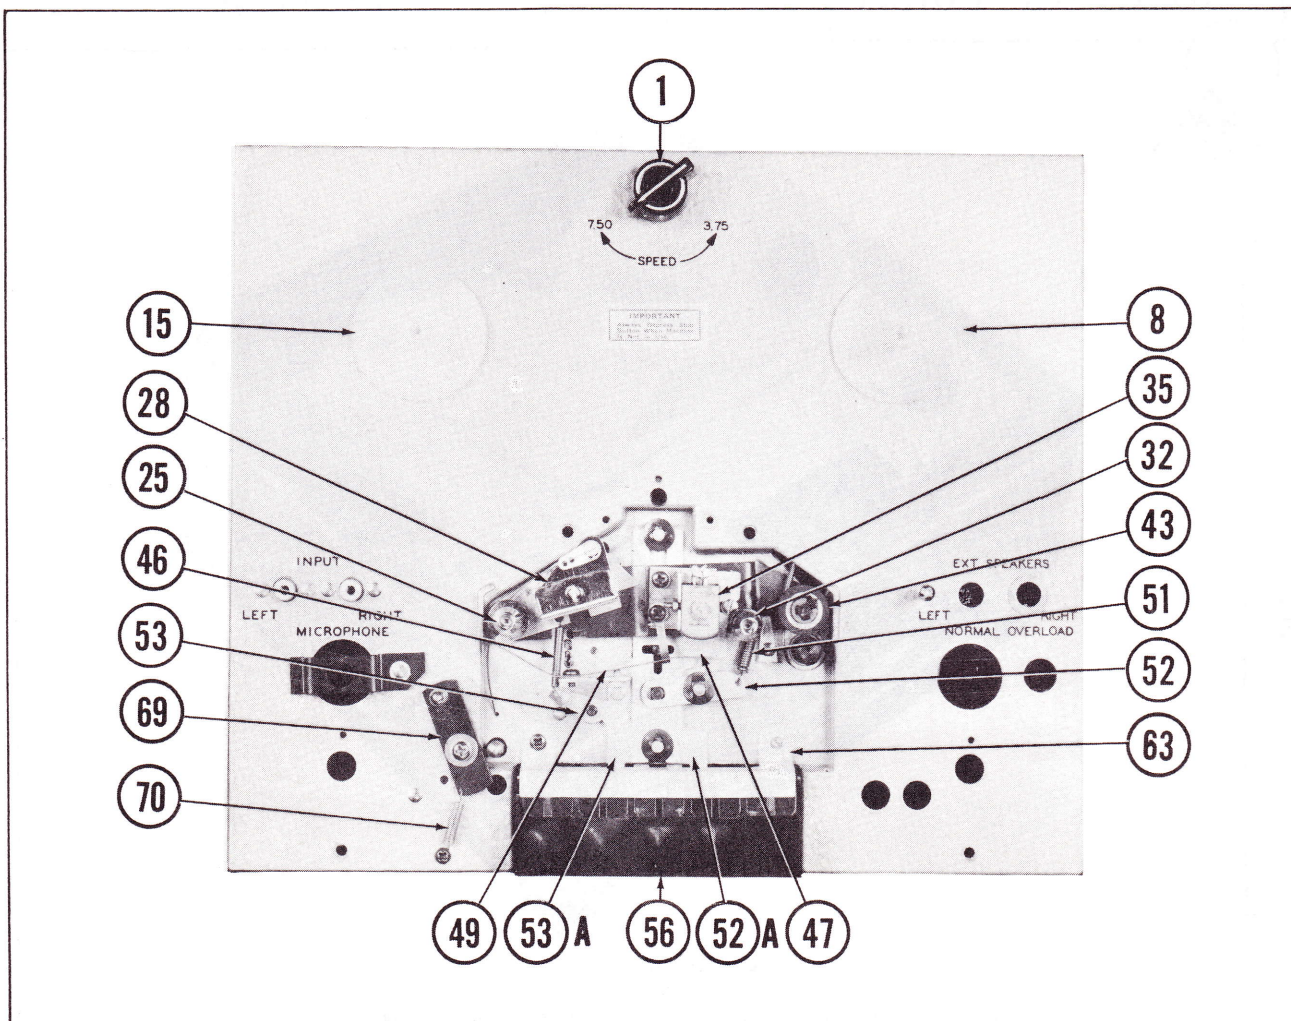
TOP VIEW OF MECHANISM WITH ESCUTCHEON REMOVED
